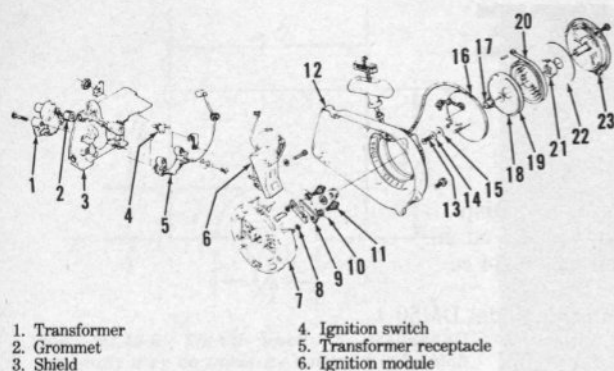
Exploded view of ignition system and rewind starter.
